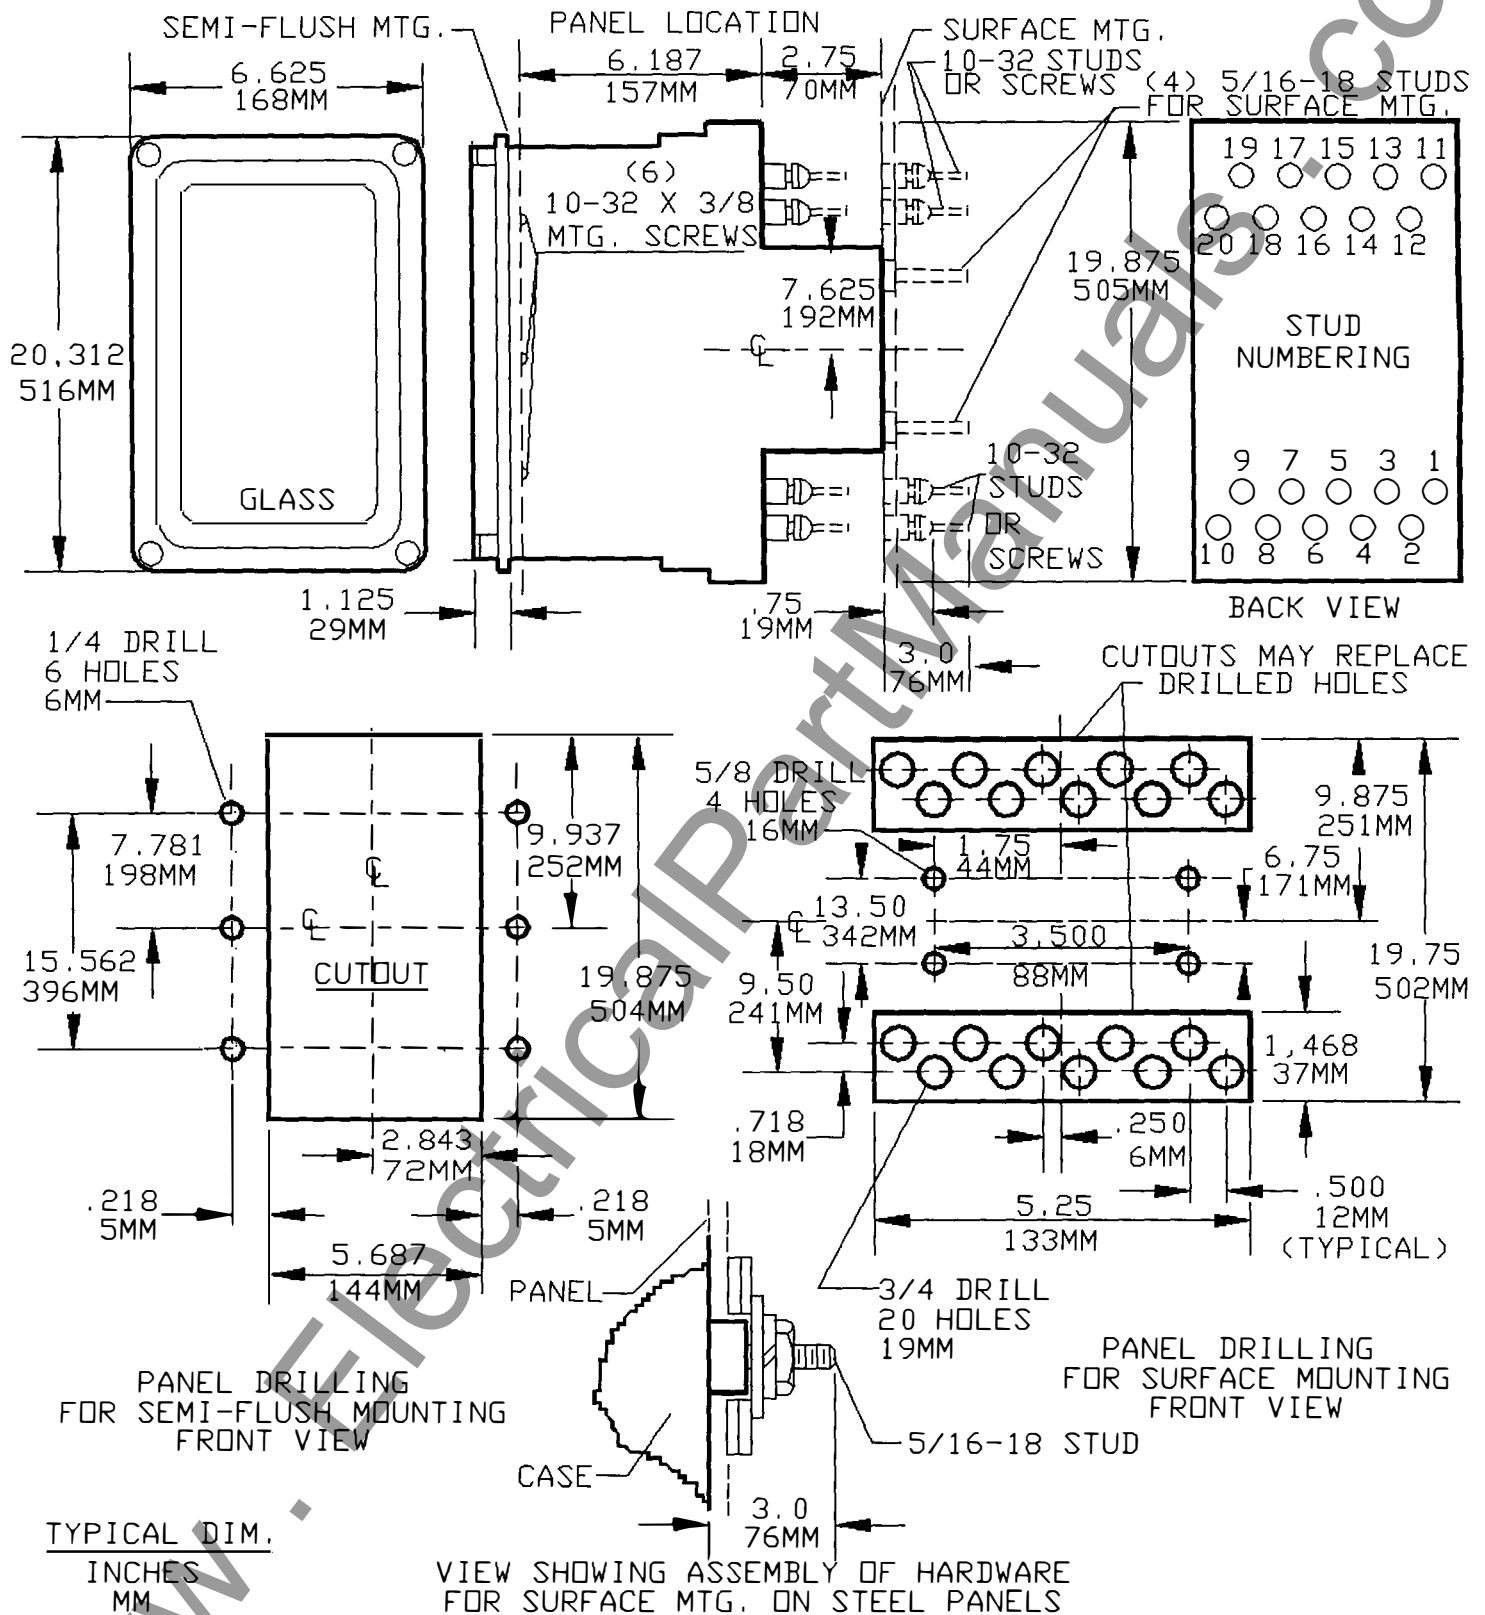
(0178A7336 [6]) Outline and Panel Drilling for Type SLY81A Relay
